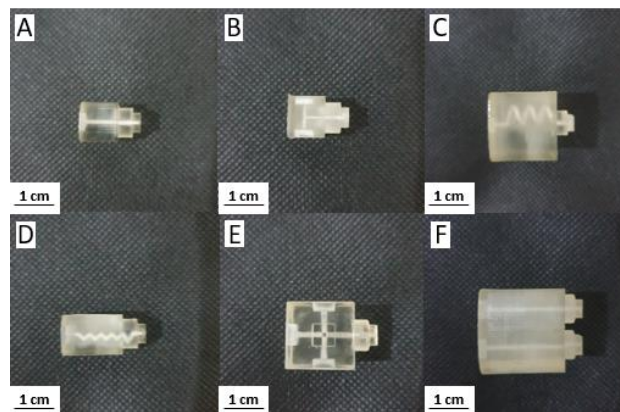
Fabrication result of connector modules with (a) straight channel design, (b) T channel design, (c) spiral channel design, (d) zig-zag channel design, (e) multi-inlet single outlet design, and (f) multi-inlet multi-outlet design.
